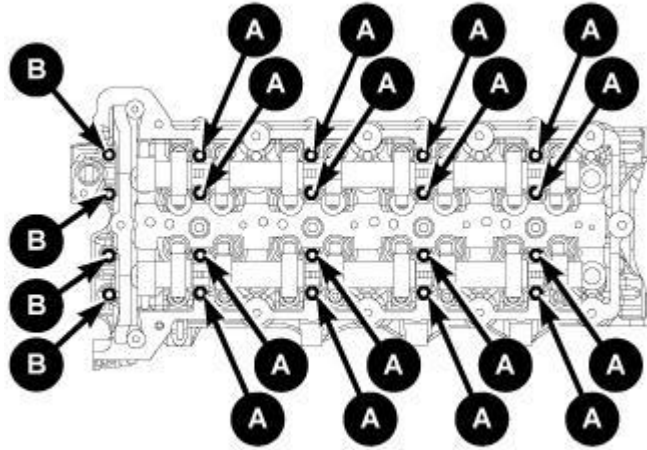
Identifying Camshaft Cap & Cylinder Head (Intake Side) Markings
